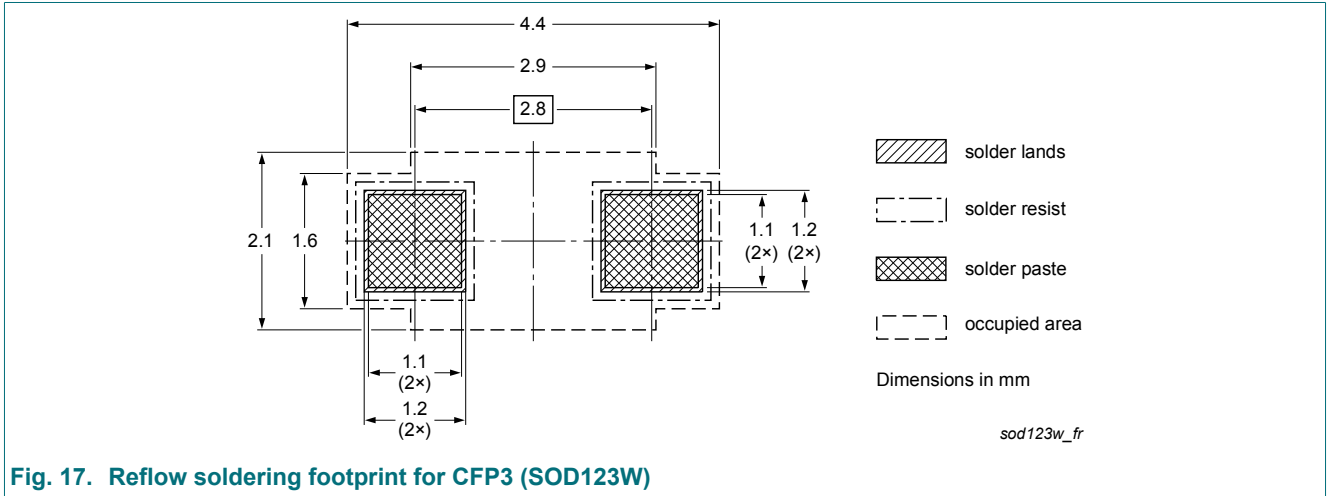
Reflow soldering footprint for CFP3 (SOD123W)
